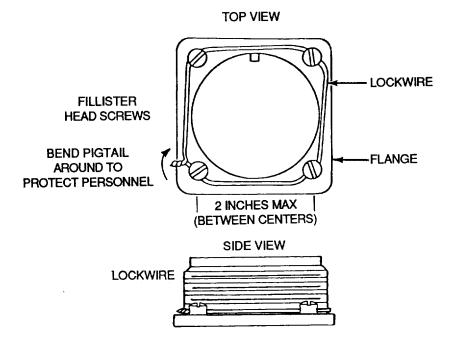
Single Wire Method of Locking Flanged Type Receptacles
